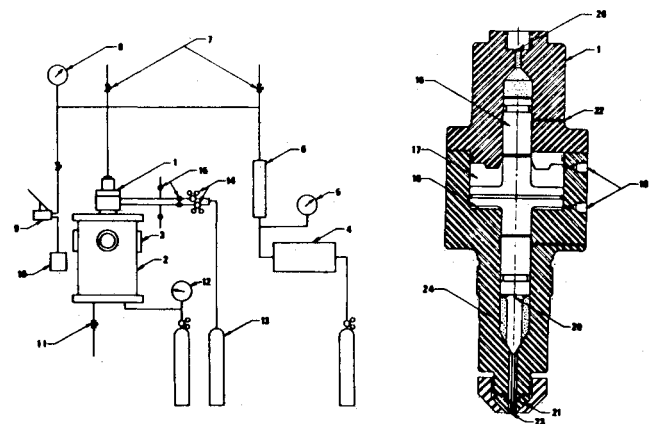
Spray apparatus and details of the injection cylinder: 1) injection cylinder, 2) spray chamber, 3) window, 4) gas reservoir, 5) driver gas pressure gage, 6) liquid reservoir, 7) bleeding valves, 8) test liquid pressure gage, 9) hand pump, 10) test liquid tank, 11) drain, 12) chamber gas pressure gage, 13) nitrogen cylinder, 14) regulators, 15) solenoid valves, 16) valve unit, 17) upper control gas chamber, 18) lower control gas chamber, 19) control gas ports, 20) test liquid conduit, 21) nozzle piece, 22) leak off, 23) nozzle, 24) test liquid.
